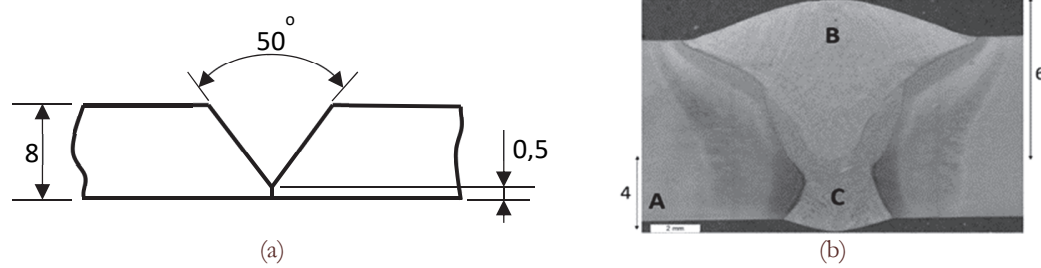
Schematic representation of (a) joint design and (b) welding sequence (A: base metal; B: face pass; C: root pass) (dimensions in mm).
